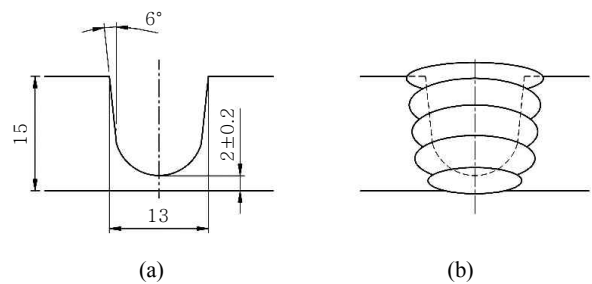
Shapes of U-shaped groove (a) and welding path (b)
